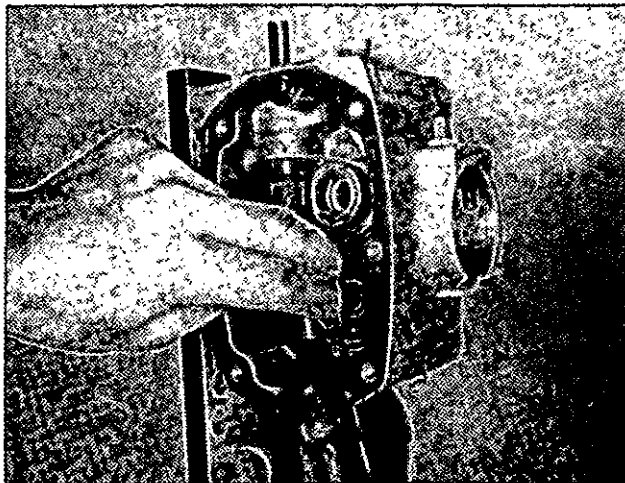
, (F513). Remove the tachometer drive assembly from the housing.
